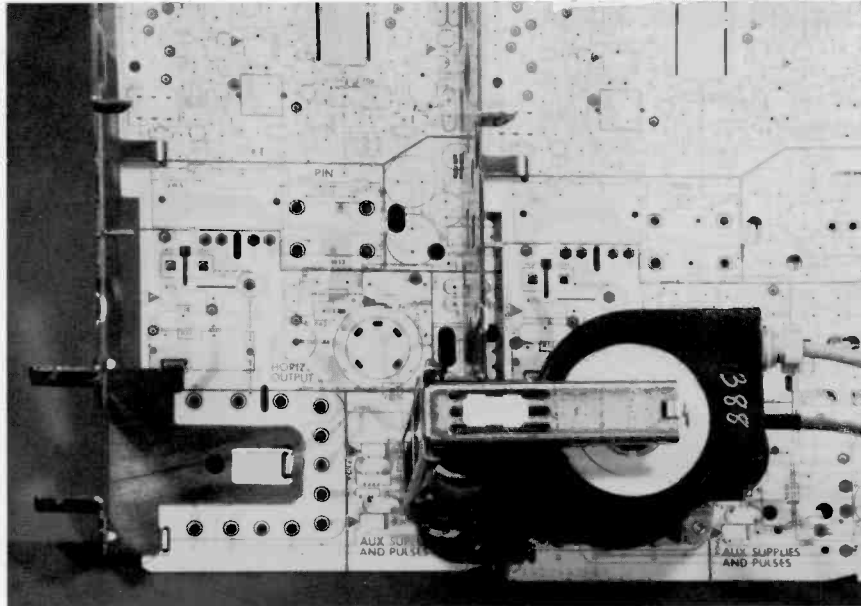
The flyback transformer is electrically connected to PC board but, as can be seen in the view with flyback removed at left, it is mechanically supported by the rear apron.
